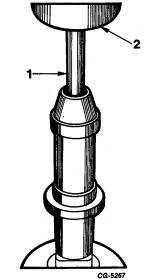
Pressing Out Upper Bushing using Knock-Out Bar
